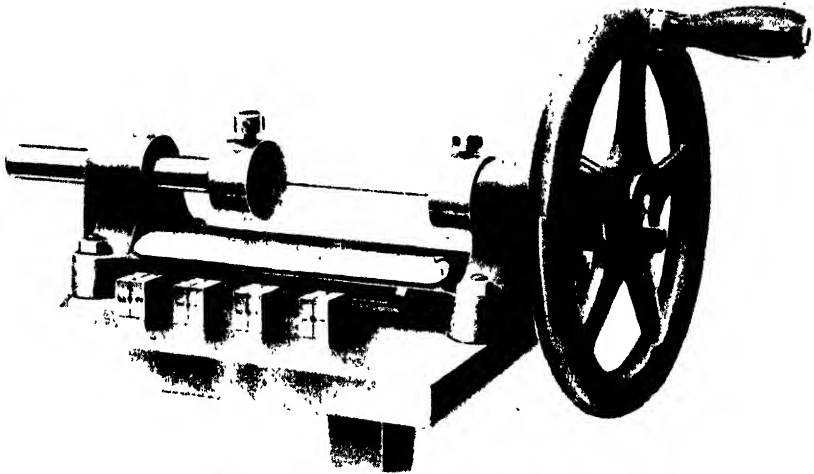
THE AVERY WIRE TWISTING MACHINE
